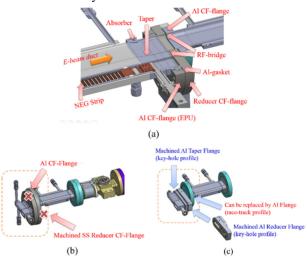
Drawings of the EPU-chamber and adjacent beam duct of (a) cross section view, (b) Al and Reducer CF-flanges, and (c) Machined Al Reducer flange with key-hole profile.
